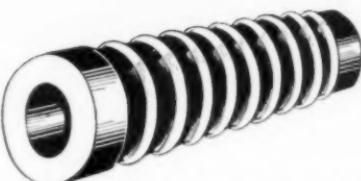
The high resistance to wear possessed by carbide enabled this burnishing bar to burnish far more than 5,000 piston pin holes in cast iron pistons without requiring maintenance. The chrome plated burnishers formerly used produced between 50 and 100 pieces each.
